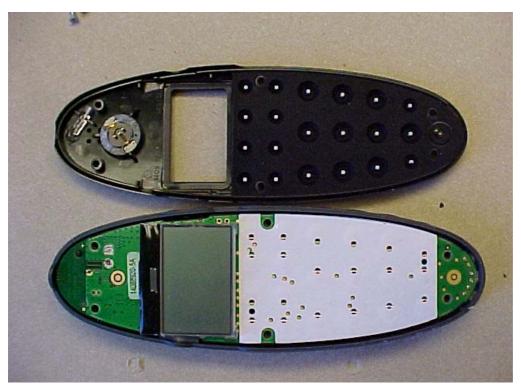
Visual inspection after salt mist testing (no salt deposits inside).
